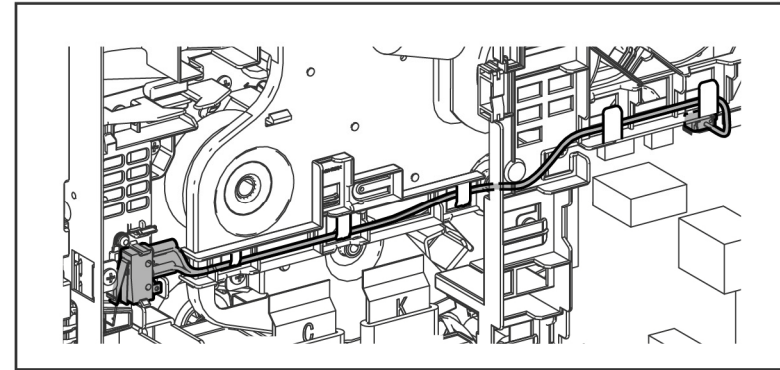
Remove the Rear Interlock Harness Assembly (MFP)
